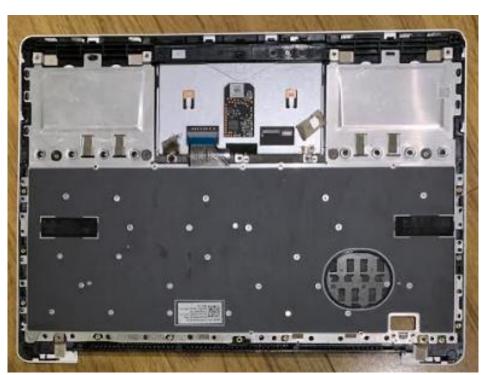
Back of keyboard/trackpad shell with metal base and fingerprint scanner removed
